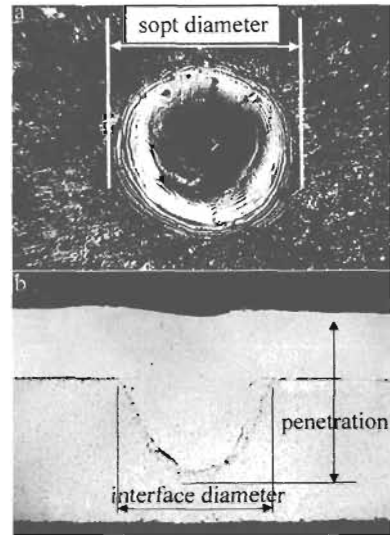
Characteristic dimensions of a spot weld a—top view b—cross-section view
